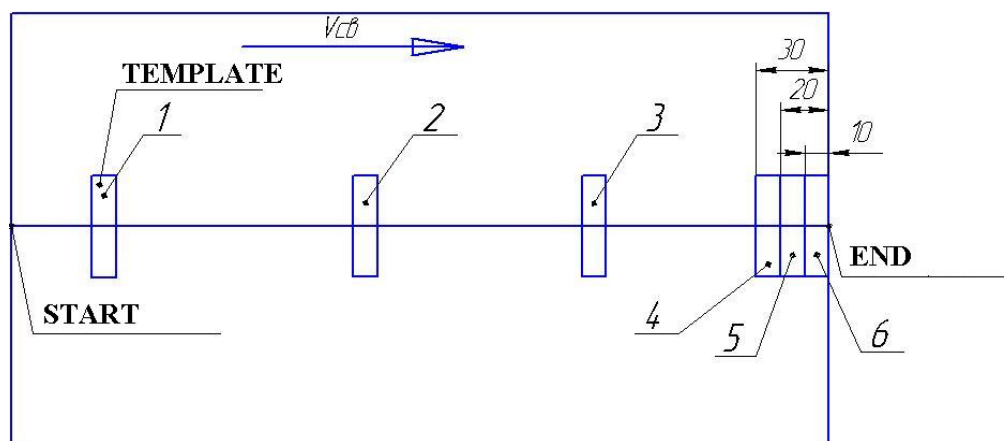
Scheme of templates cutting out from the sample weld seam
